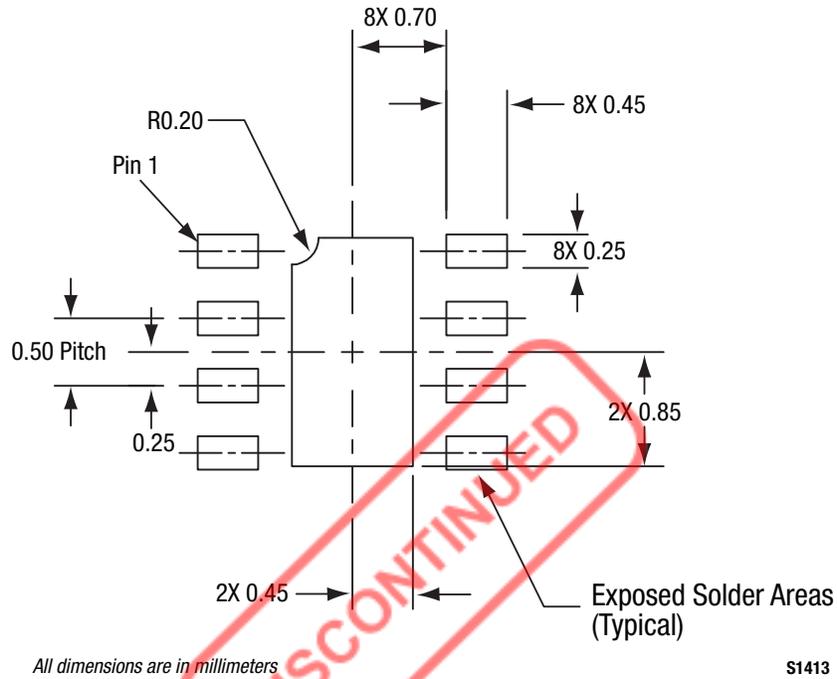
SKY67102-396LF PCB Layout Footprint (Top View)
